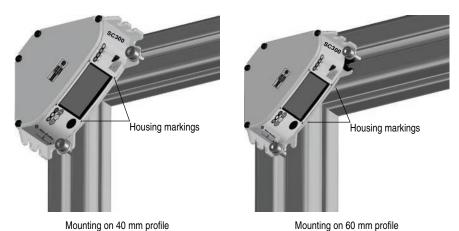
Example: mounting with sliding nuts on different thickness profiles
